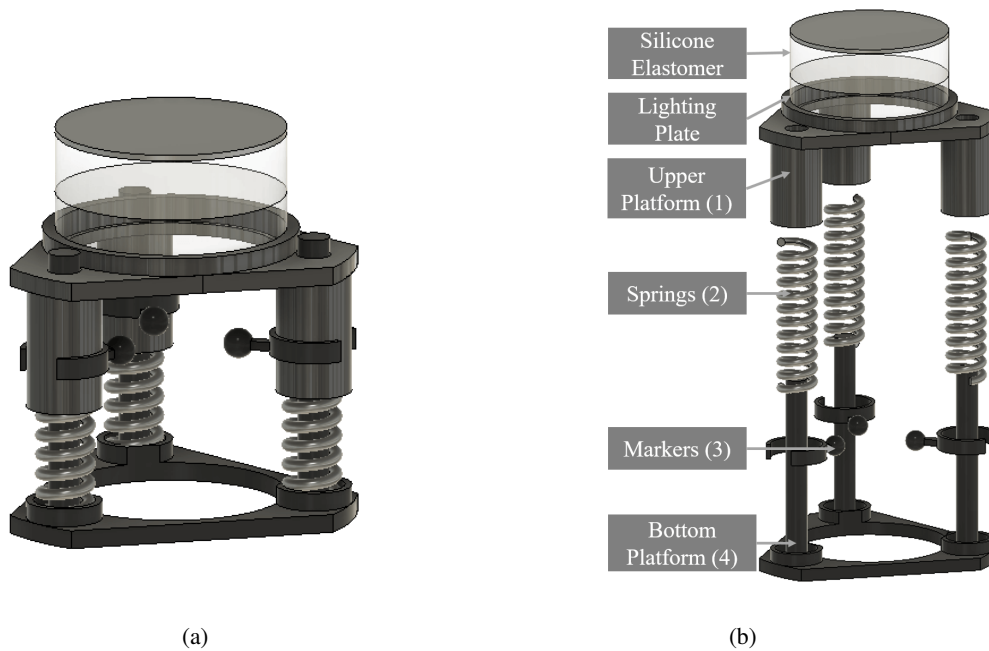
CAD drawing of the proposed spring mechanism structure (elastic structure) that is made up of three compression springs and three markers. (a) Assembled view of the structure. (b) Exploded view of the structure.
